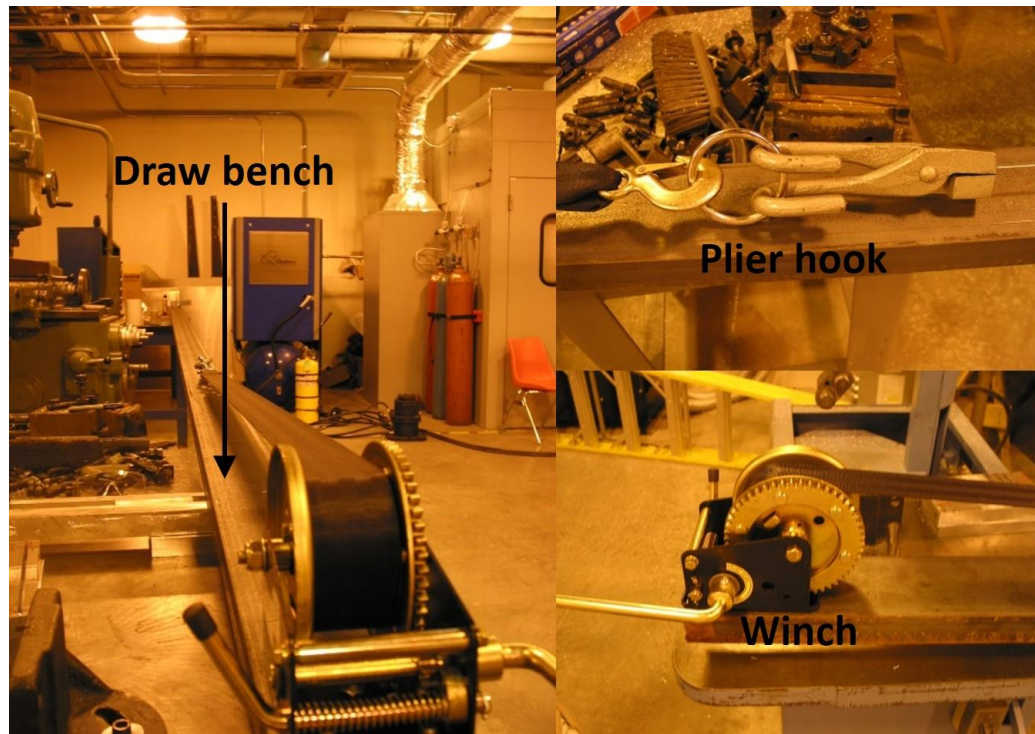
Drawing bench, winch and plier hook used in post-extrusion drawing
